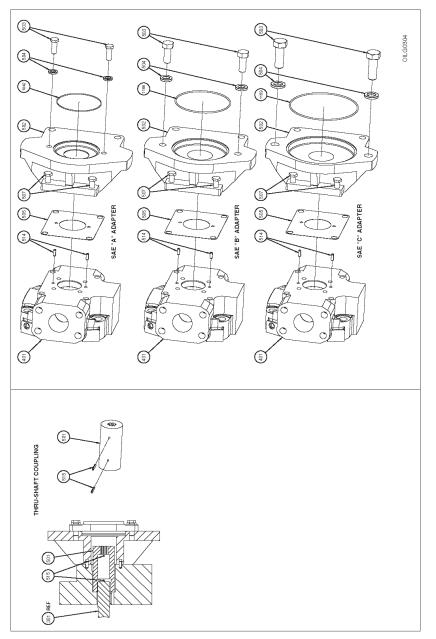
Exploded parts drawing, PVWJ-064/-076/-098/-130 C-Frame, Thru-Shaft Coupling, SAE "A", SAE "B" and SAE "C" Adapter (520024-301 sheet 3 of 4).
